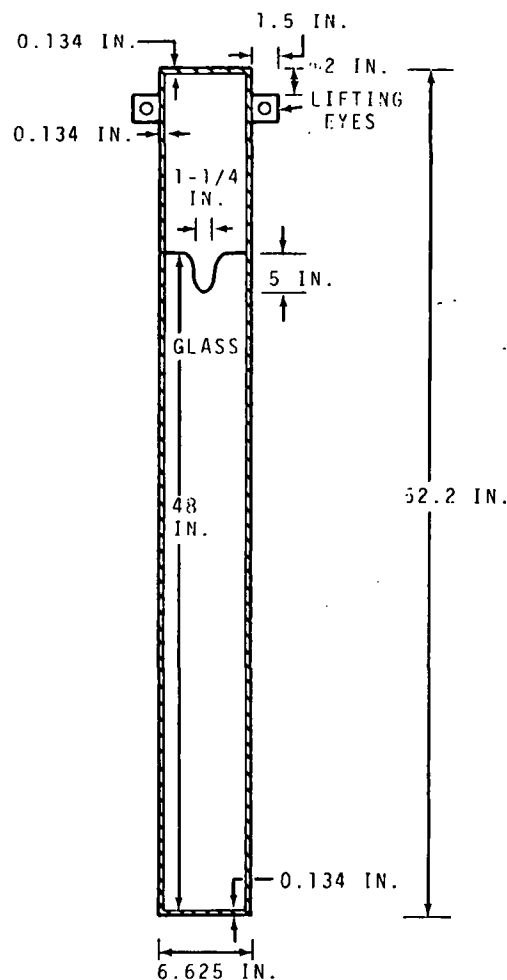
Typical Pre-Impact Dimensions of Large Specimens
